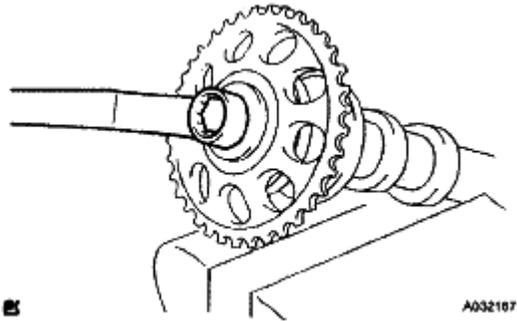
Tightening Camshaft Timing Sprocket Flange Bolt
